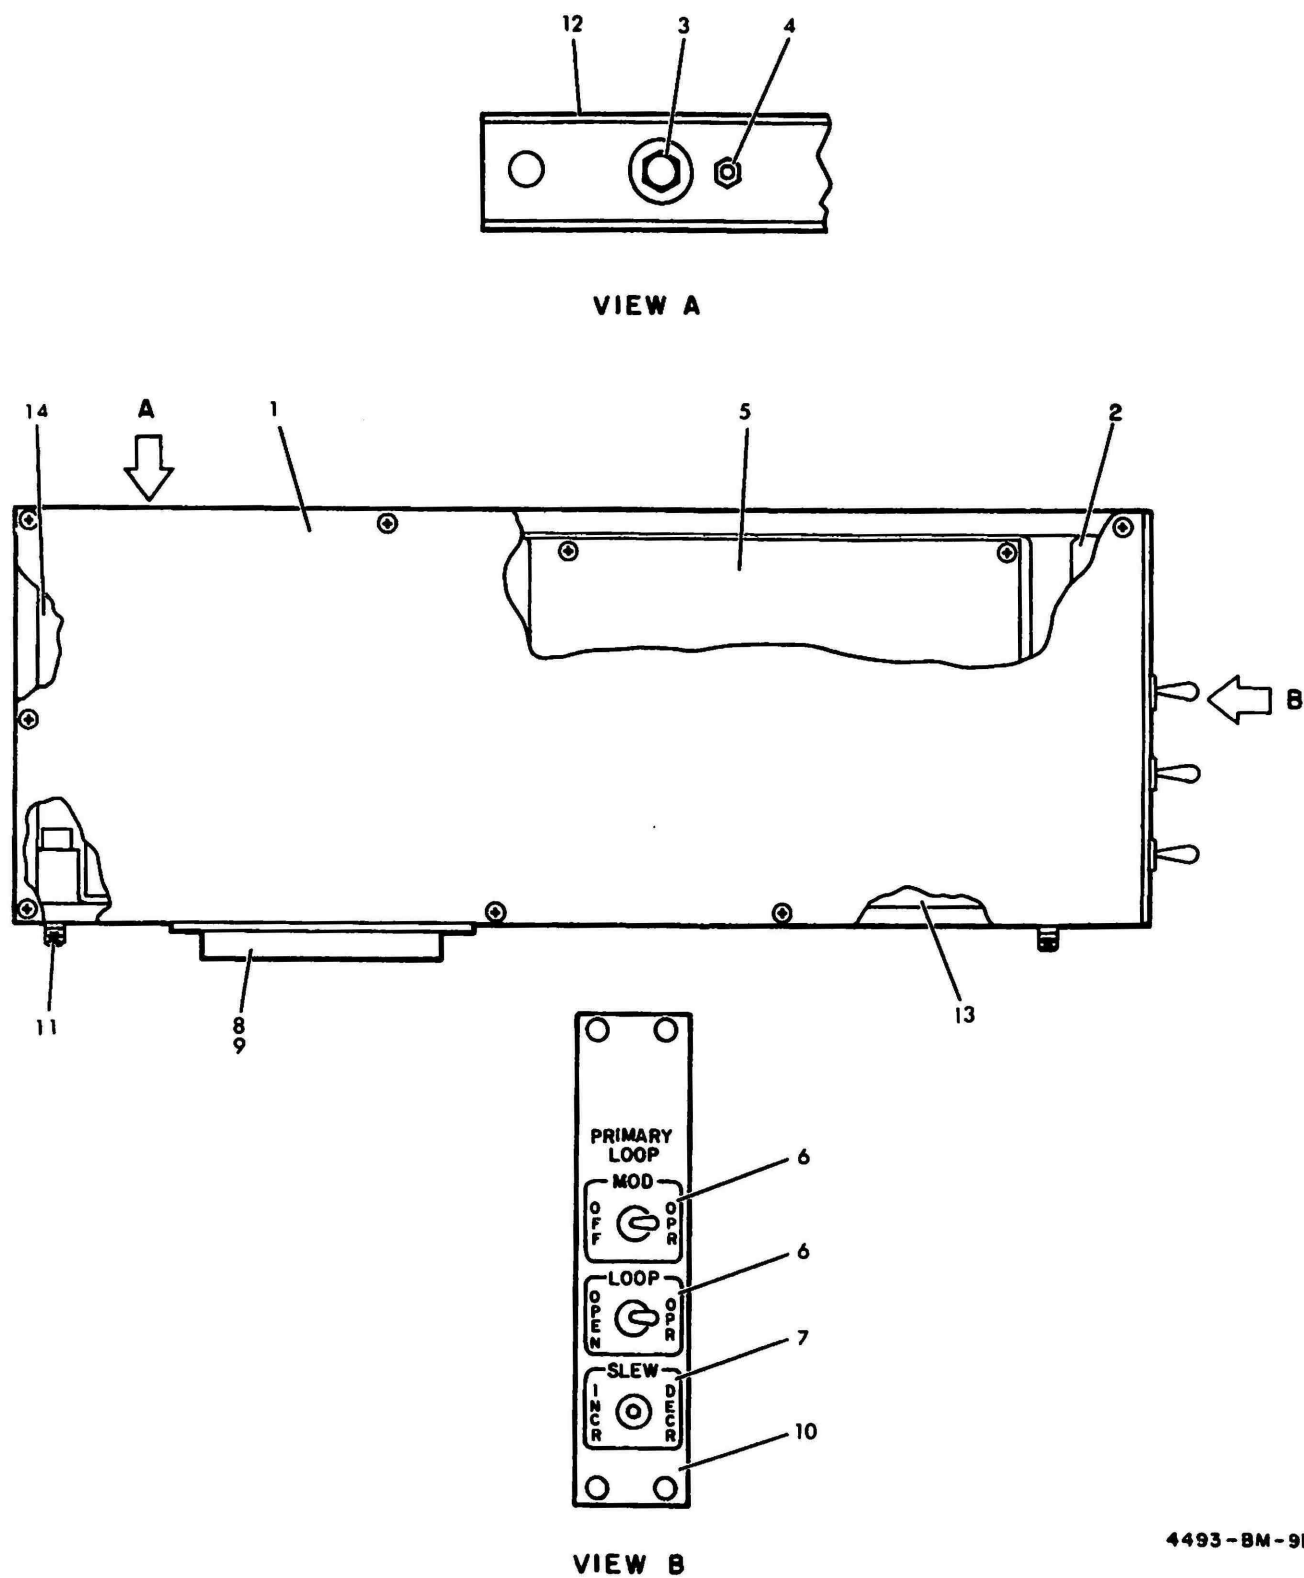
1 MHZ, 3 MHZ Generator Board Assembly (Sheet 1 of 2)
